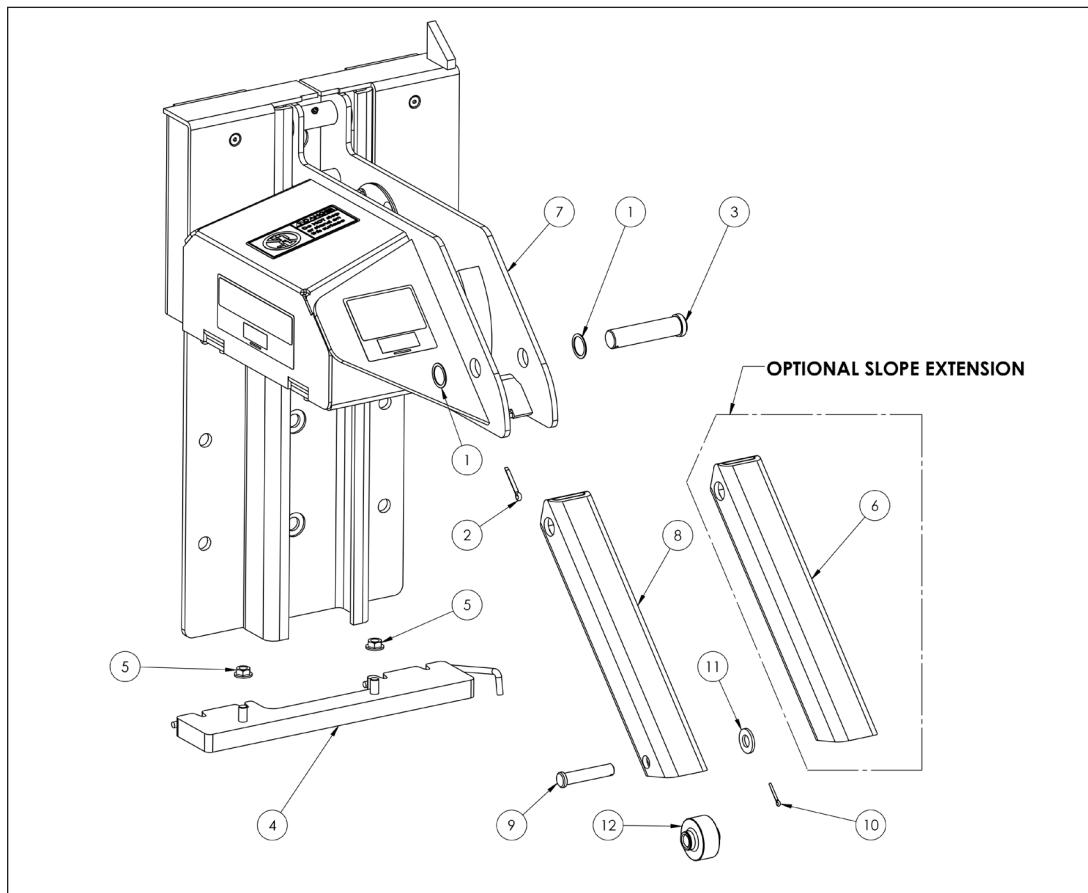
SLOPE EXTENSION ASSEMBLY
